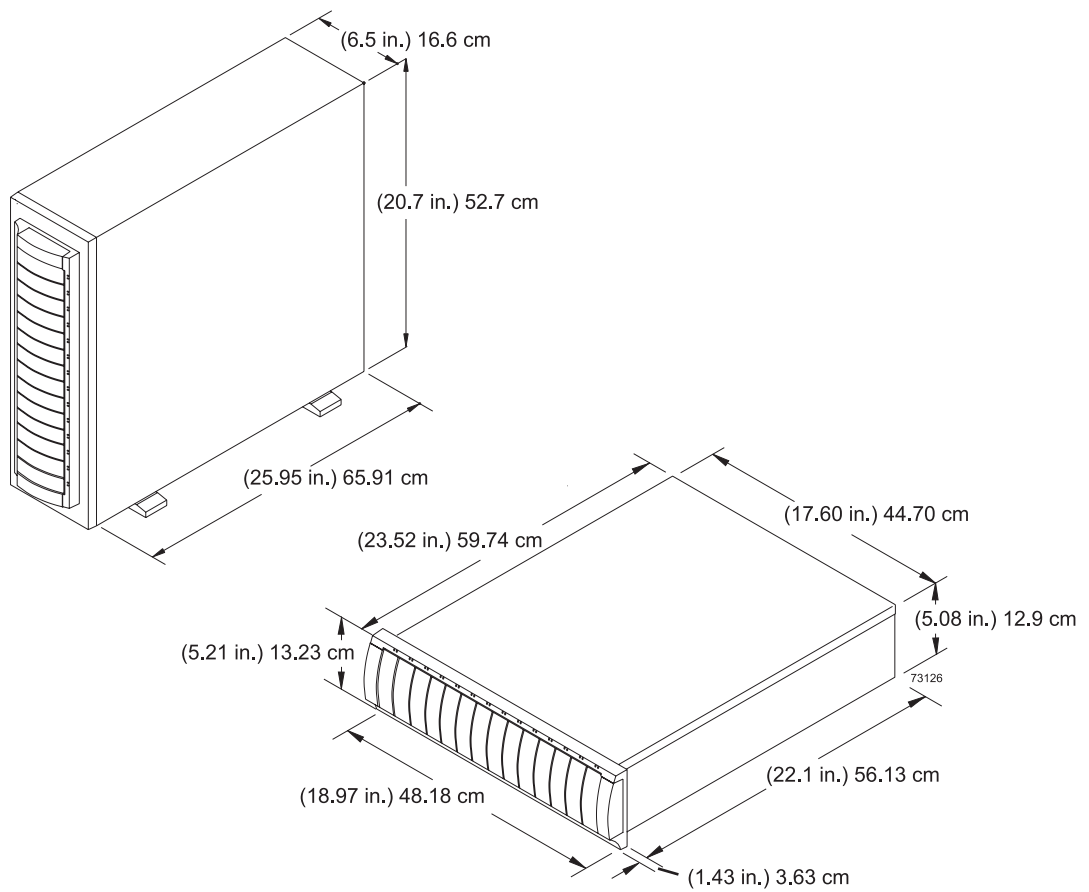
FLX240 Drive Limited Array Module Dimensions
